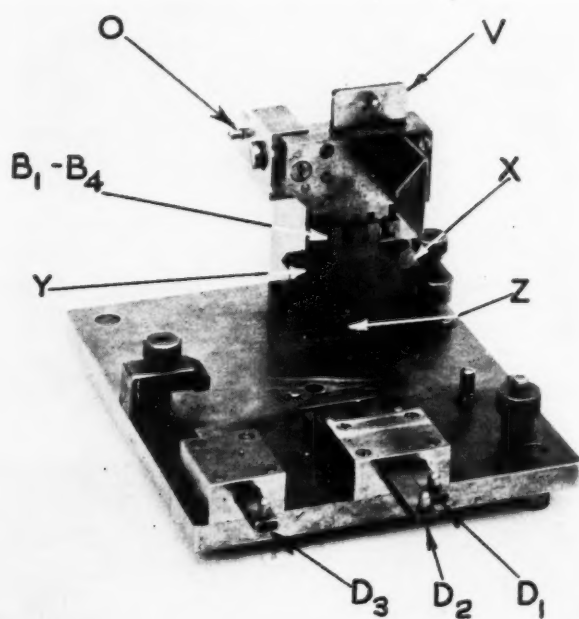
This functional gage is used in checking dimensions on the control lever unit
